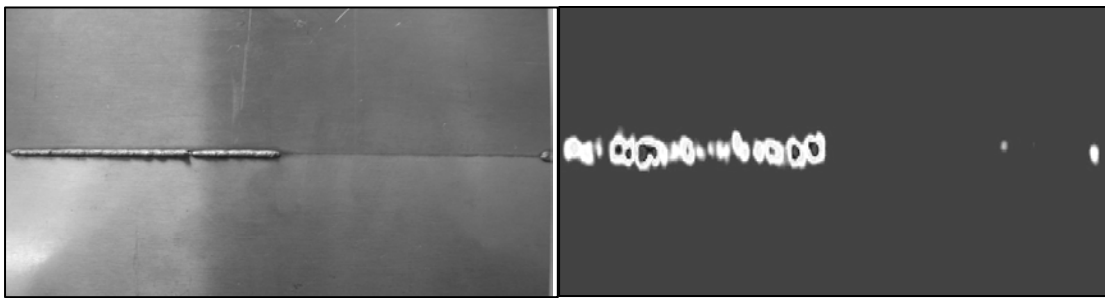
Left – photo of the laser welded joint measured; right - NACE image of laser welded joint in steel.
